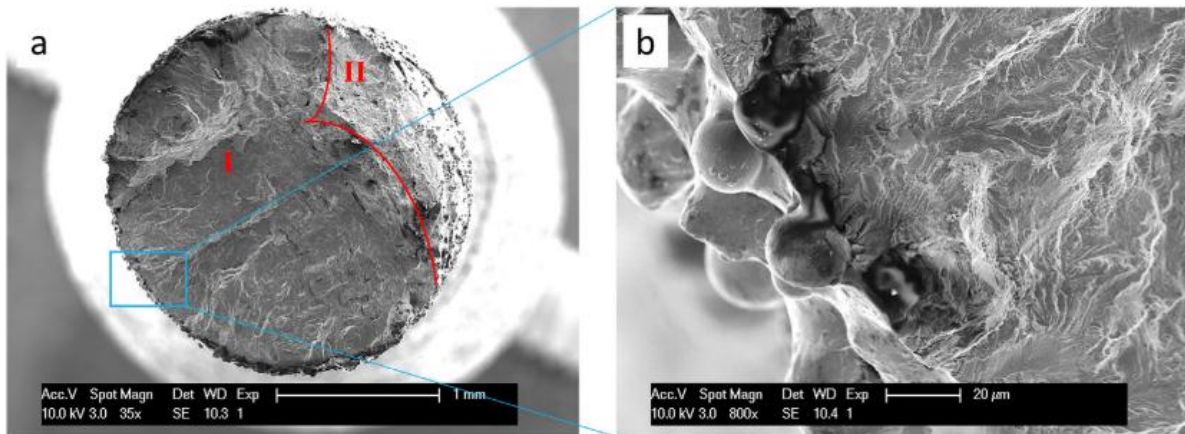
Fracture surfaces of as-built sample [$\sigma_a = 350$ MPa, 28161 cycles] (a) (b) (Elangeswaran *et al.*, 2019)
